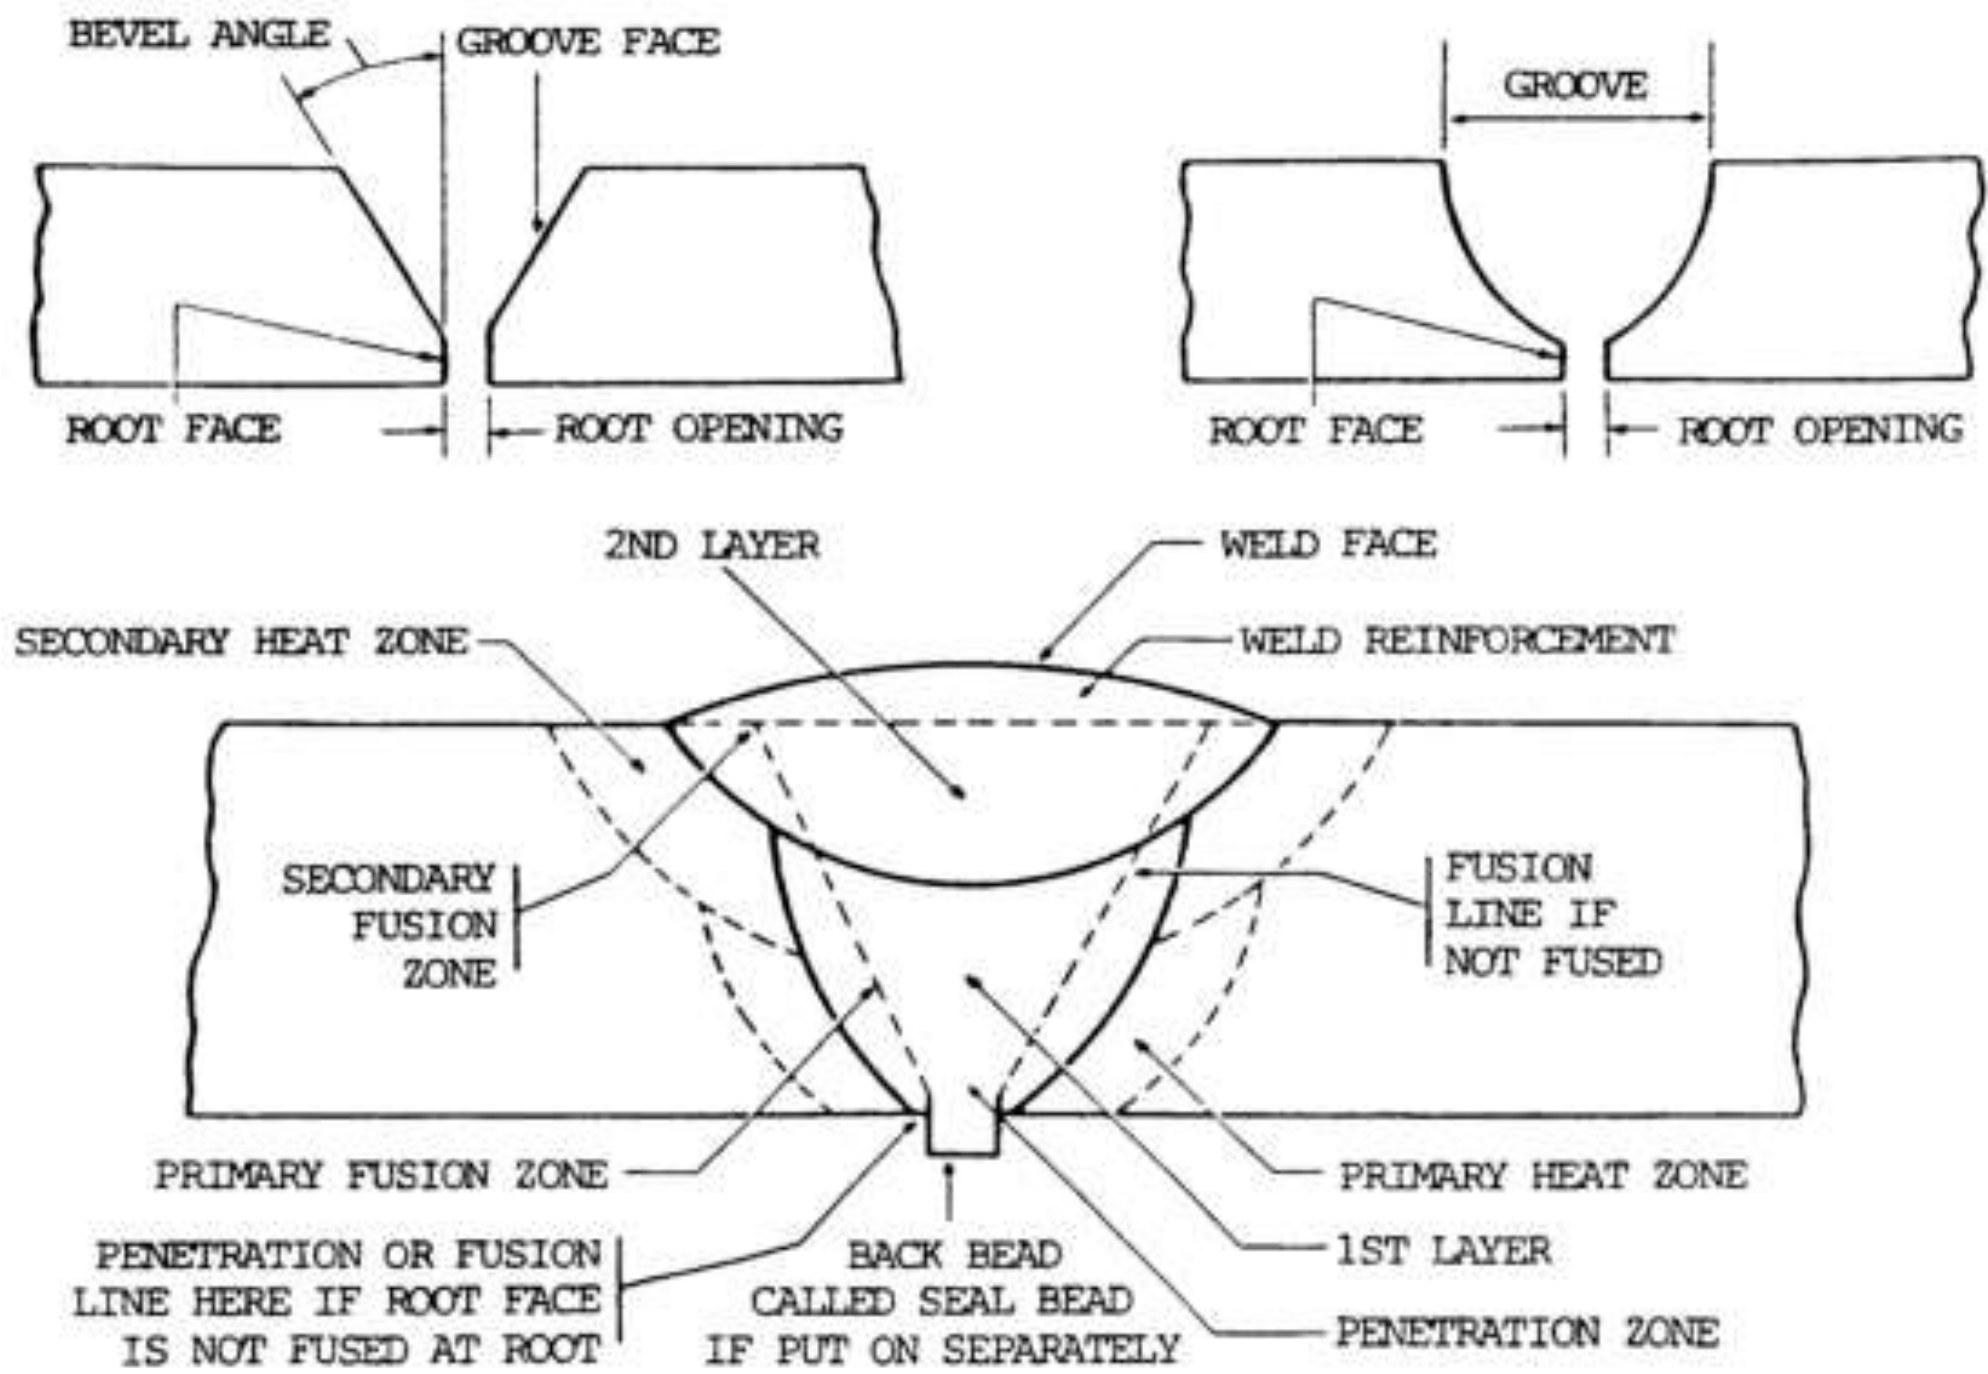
Heat affected zones in a multipass weld.
